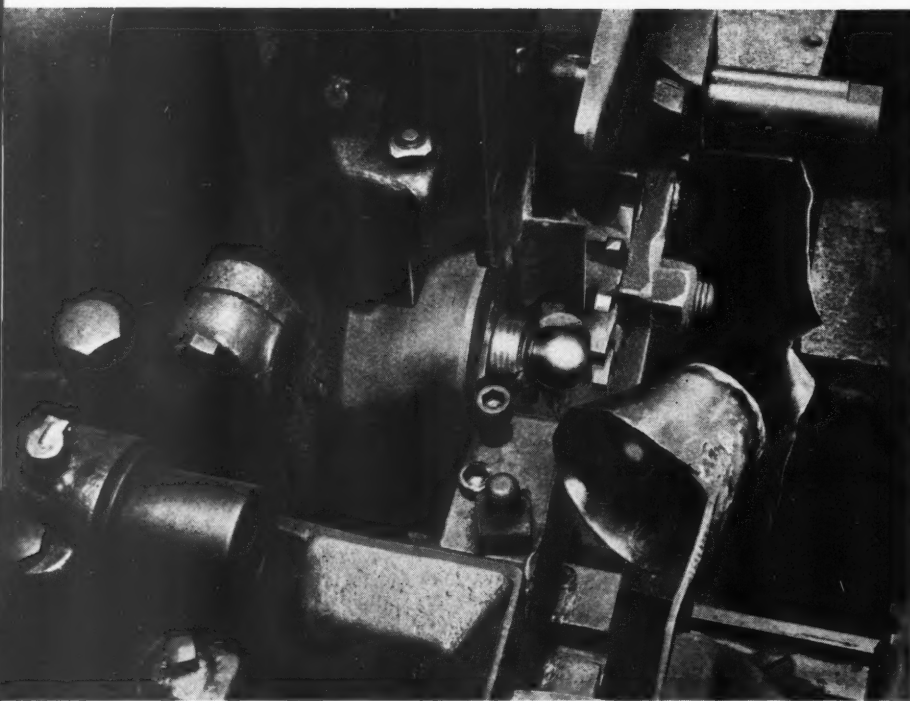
After the major portion of the graphite ball has been machined, a cutting edge on a multiple tool at the rear rounds the front or projecting end of the ball while a parting tool on the front slide finishes the rear end
